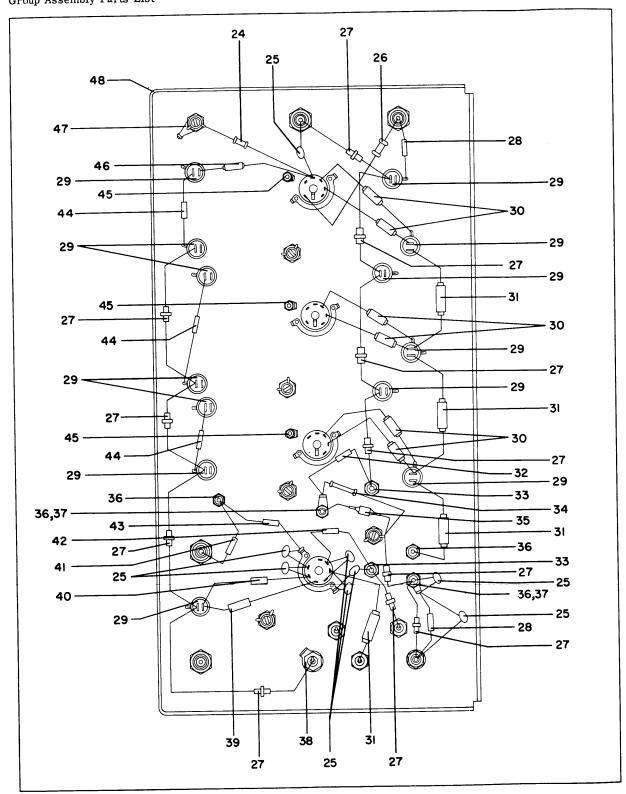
Wide Band Chassis and Cover Assembly, Bottom View (Sheet 2 of 2 Sheets), Index Nos. 24 through 48
